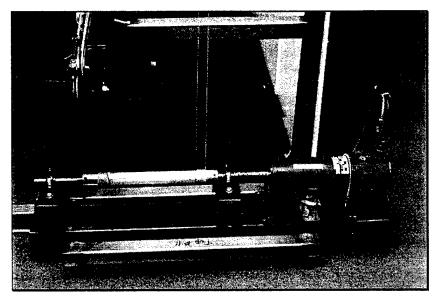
Lower right side of manipulator frame showing x-axis drive components.
